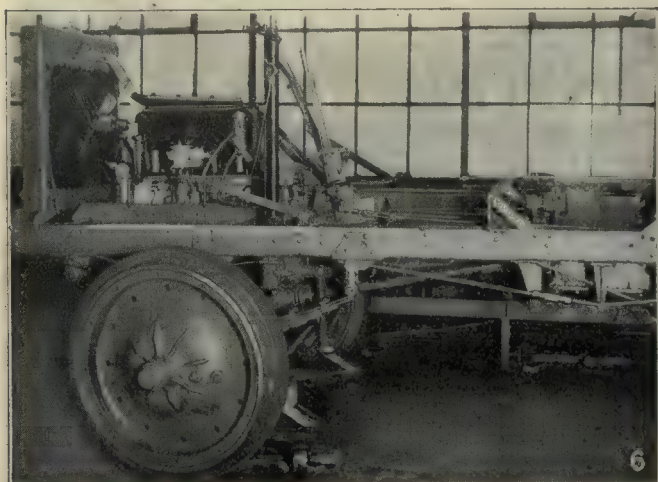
ASSEMBLY OF RADIATOR, STEERING GEAR, ETC.
